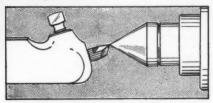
Set cutting edge of tool exactly on center for truing commutators.
